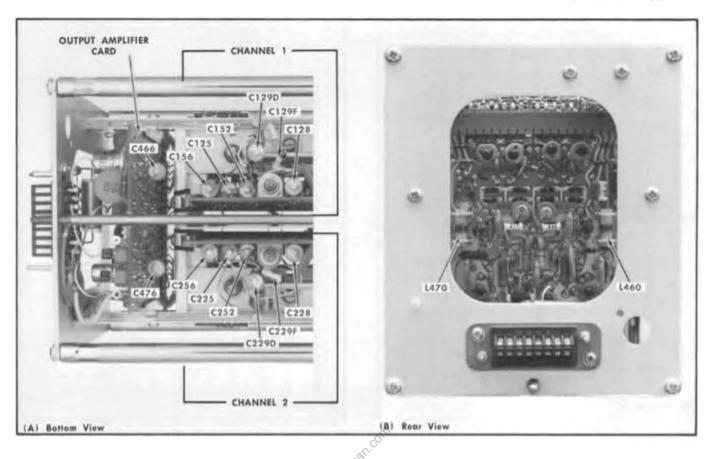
(A) Bottom and (B) rear views of the Type 1AD showing locations of high-frequency compensating adjustments.
